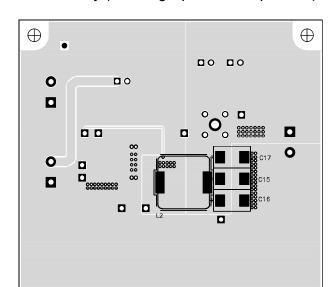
Bottom Side Assembly (Showing Optional Components)
